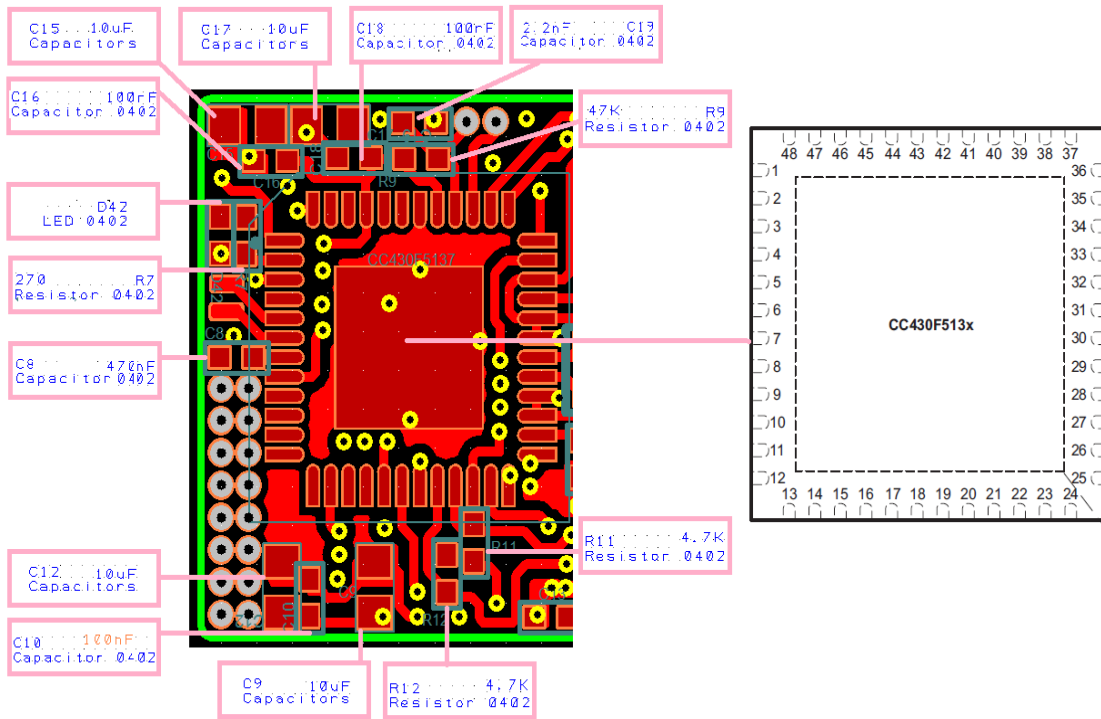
Components placed in the top layer of the eight channelled telemetry unit of dimension 24 mm x 13 mm
